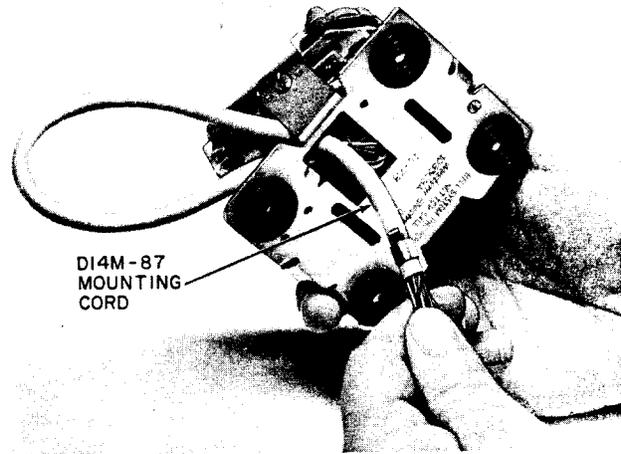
Dressing D14M Mounting Cord Through Cutout in Base of Dial
